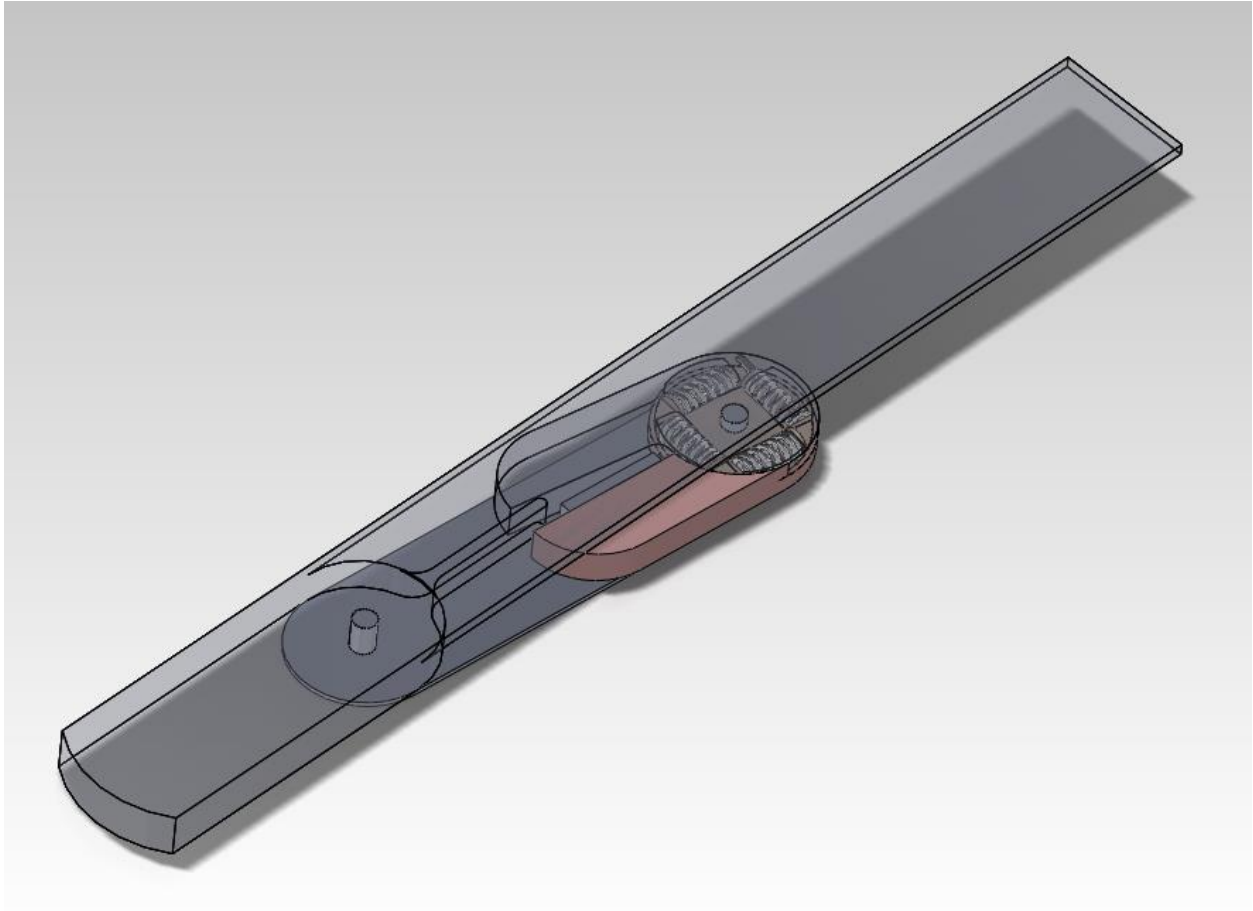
Older design for DP2.1- Dual spring plate mechanism. Rejected due to complexity and size.
